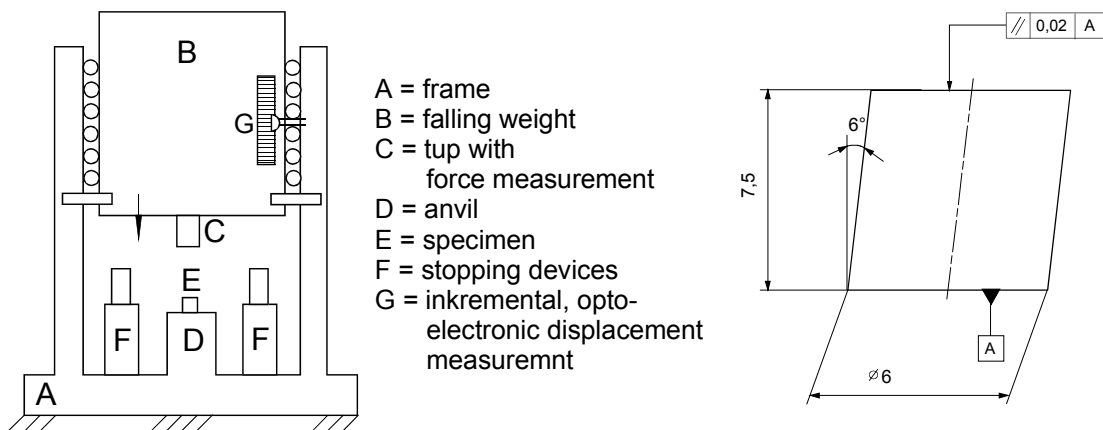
Principle of drop weight machine with biaxial compression/shear specimen with $h/d = 1.25$, front faces need to be parallel to 0.01 mm
